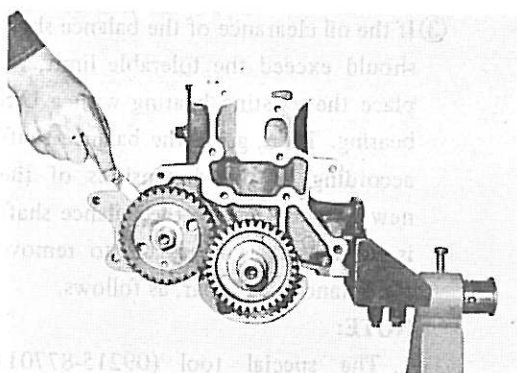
Measuring Balance Shaft Thrust Clearance
